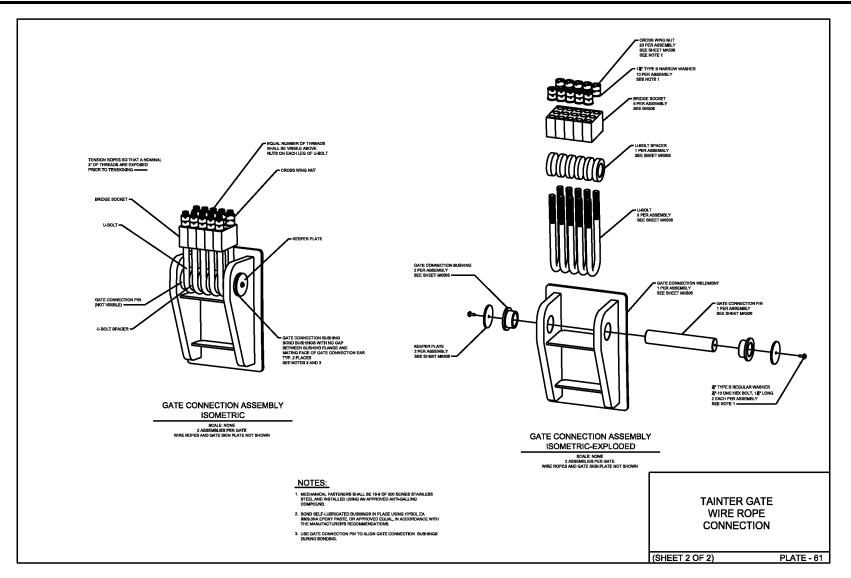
Plate 61: Tainter gate wire rope connection (sheet 2 of 2)
